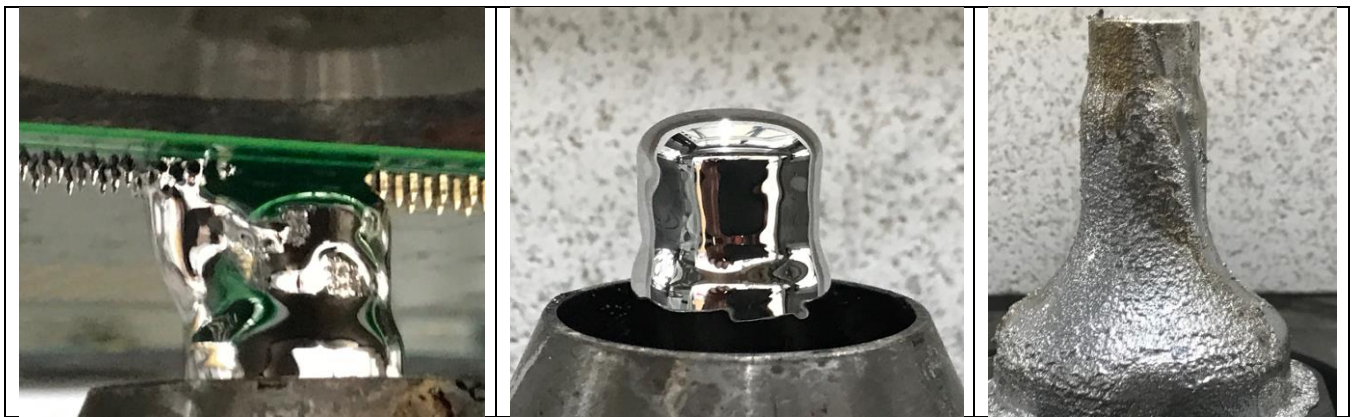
Alloy B soldering very good at 270°C but some issues at lower temperature with hole filling.
